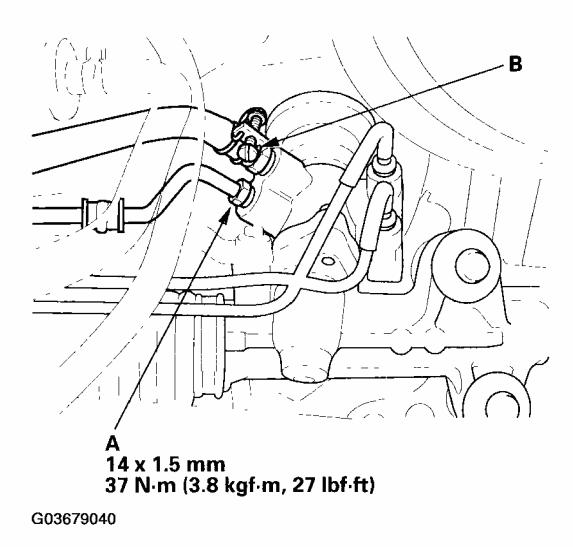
Identifying Adjustable Hose Clamp Tightening Torque Courtesy of AMERICAN HONDA MOTOR CO., INC.
